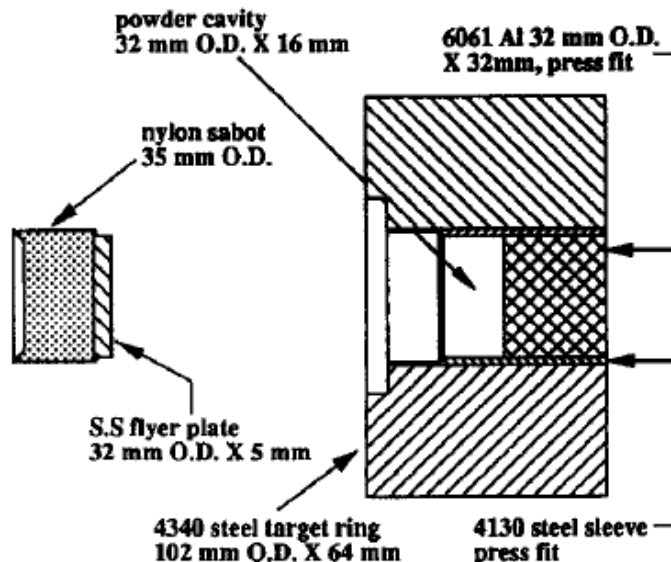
Target fixture and flyer plate assembly used in the shock consolidation. Note that only the sample, and not the containment assembly, is impacted
